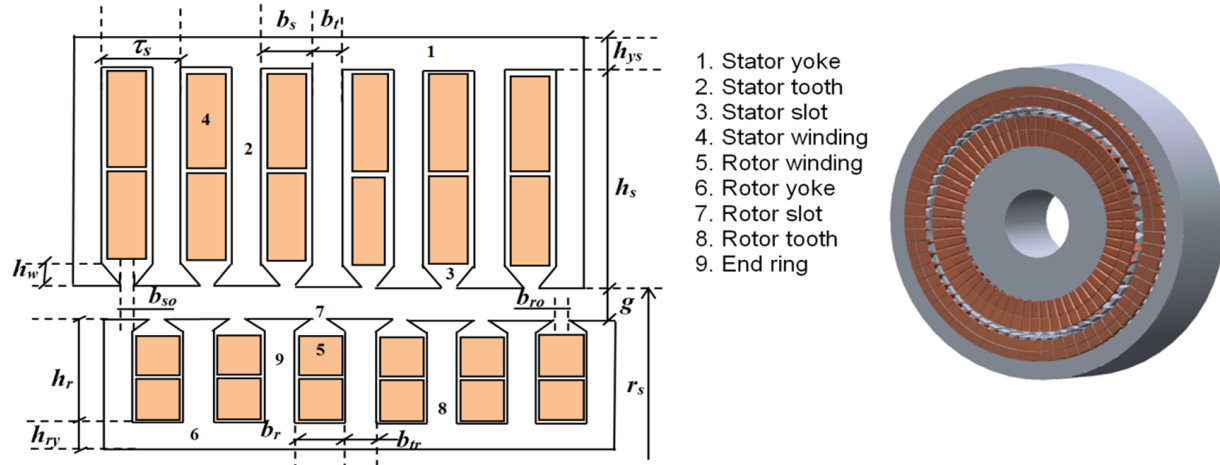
DFIG module within GeneratorSE; design dimensions (a) and CAD illustration (b). Illustration reproduced from [14].
